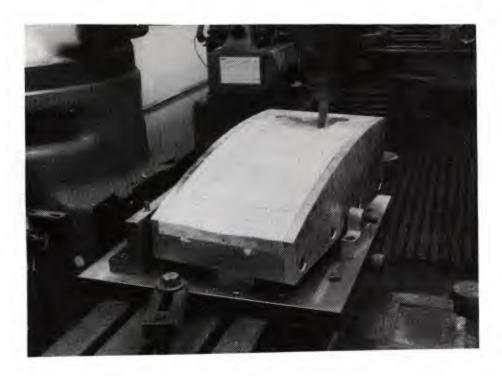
Milling Root Pocket in 4X Plaster Model (#76-5319)
